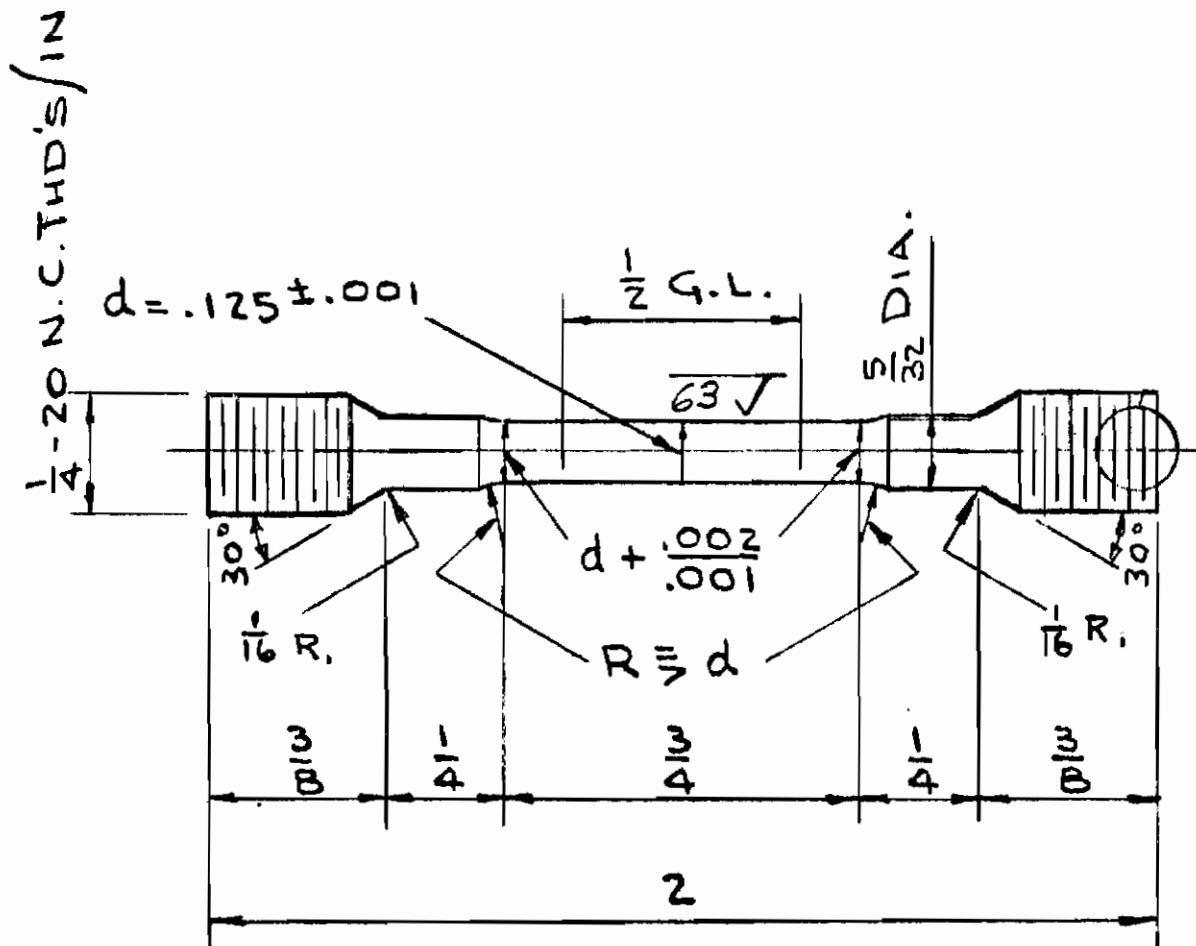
0.125-in. Diameter Tensile Specimen for Stress Corrosion Tests.
